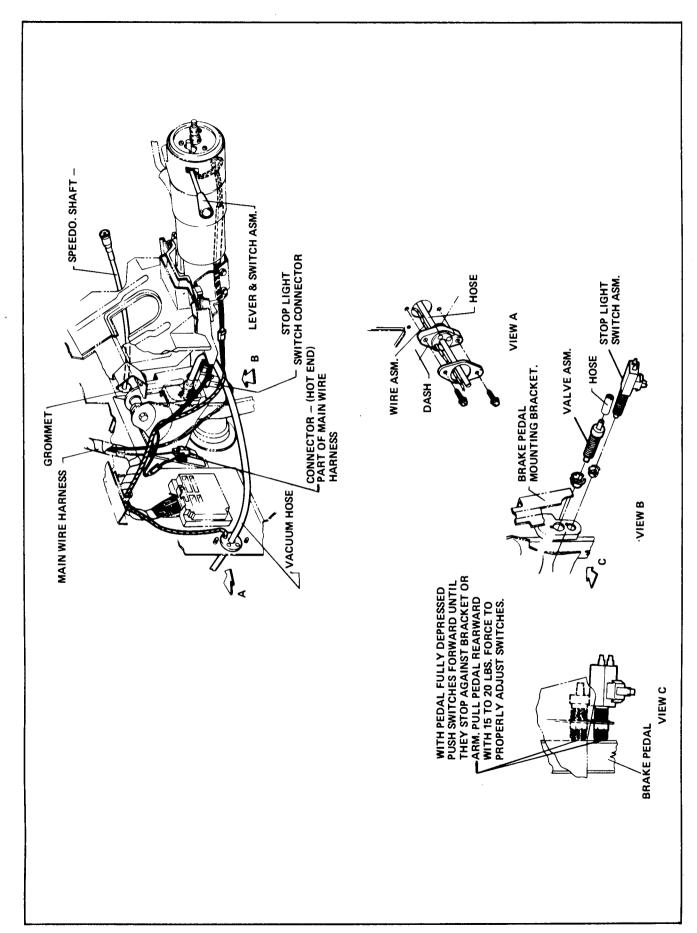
B Series Cruise Control Wiring and Vacuum Switch Installation
